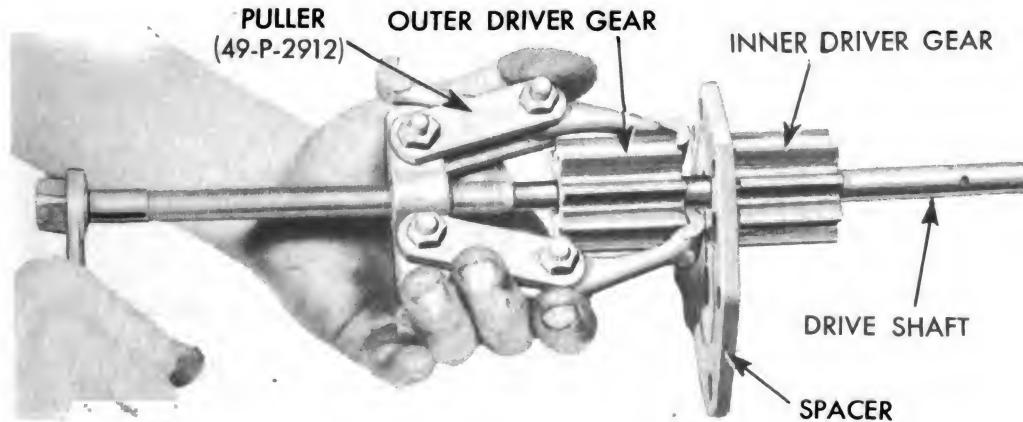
Removing Scavenger Pump Outer Driver Gear, Using Puller
